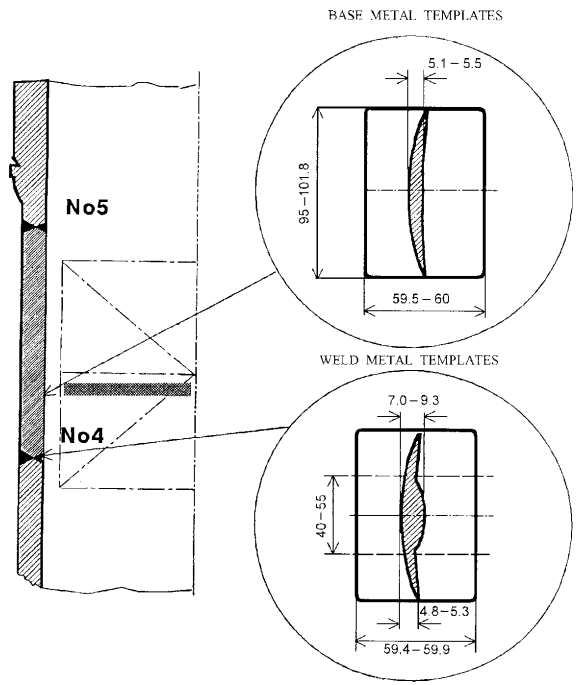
Templates cutting out scheme (dimensions in millimeters).
